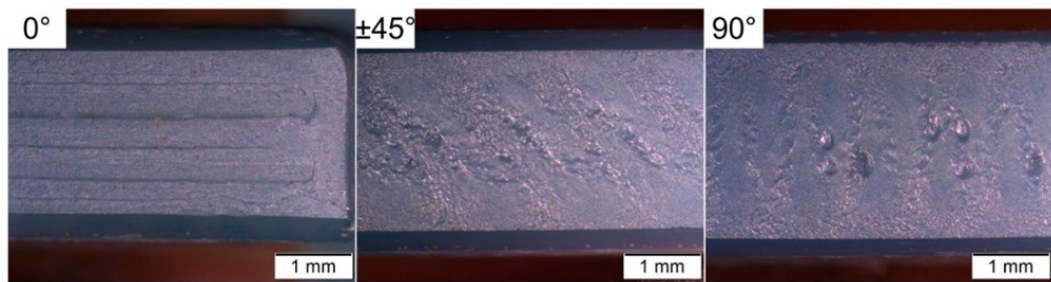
Defects on bottom layer of sintered bending specimens with 0°, ±45° and 90° raster orientation (adapted from [127]).
